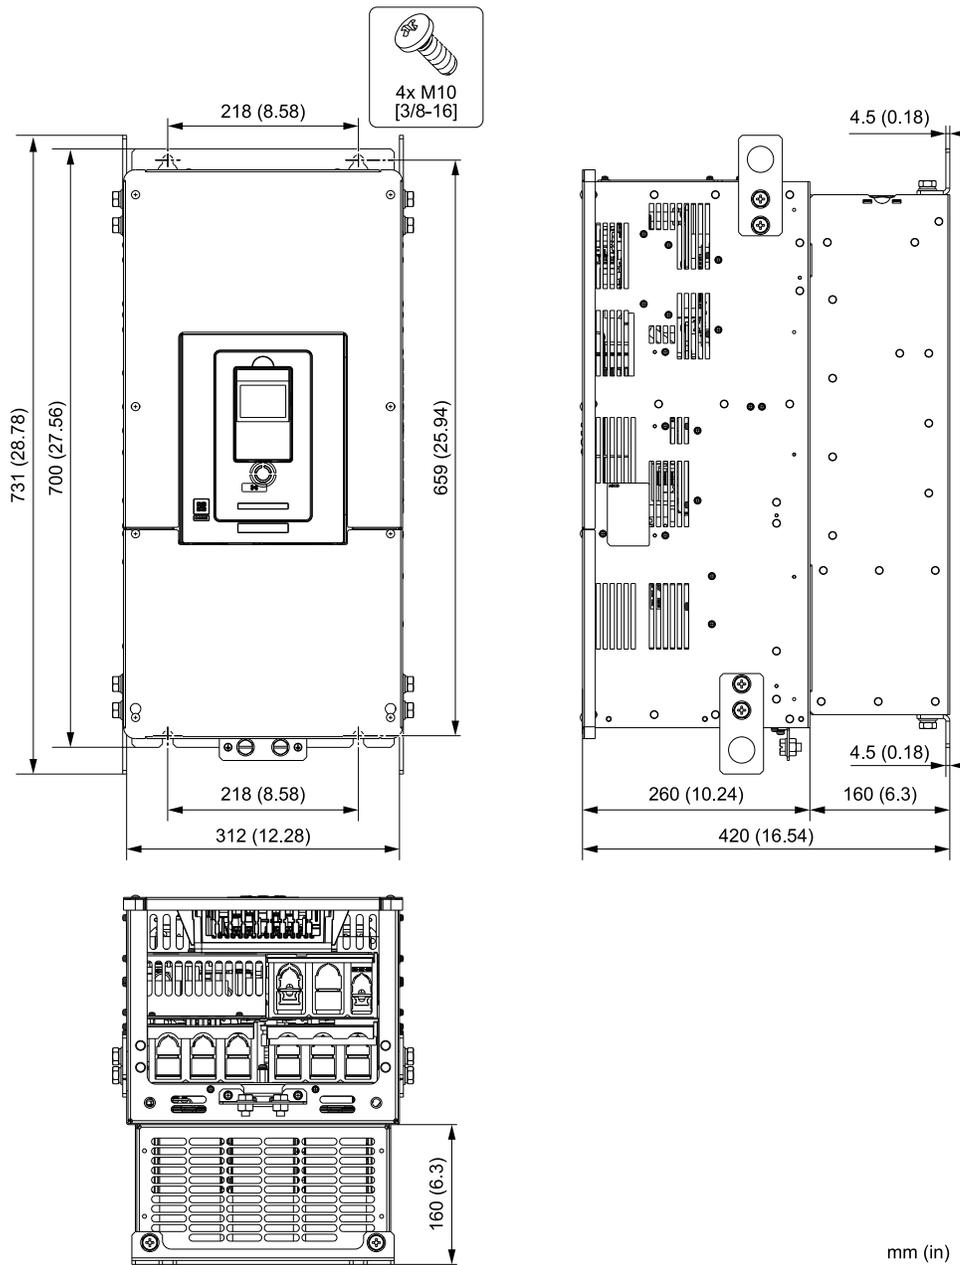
Exterior and Mounting Dimensions Diagram 1
